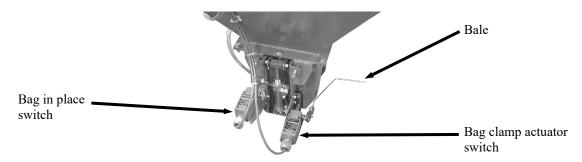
Bag Clamp Actuator and Bag In Place Switches
